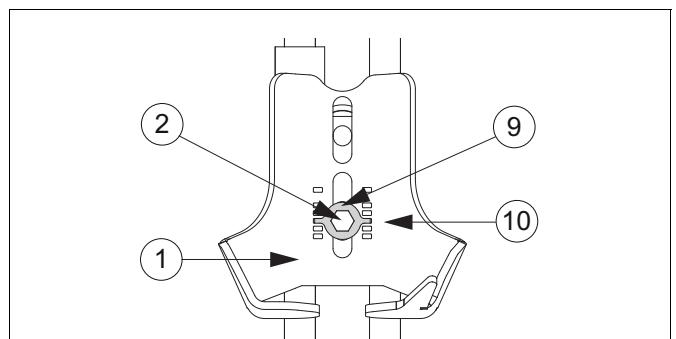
Adjust shoulder lifter with optional Neck Skin Cutting Module
